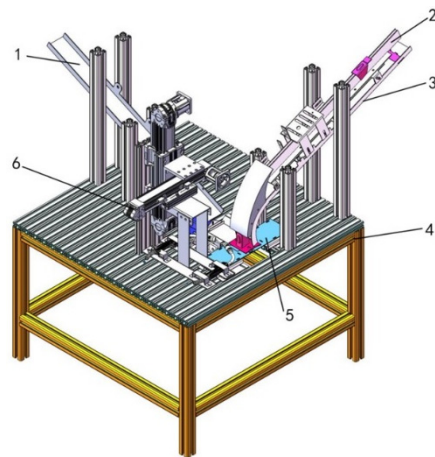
Structure diagram of duckbill welding robot for cotton seeder. 1. Girdle feeding mechanism; 2. static duckbill feeding mechanism; 3. hinge feeding mechanism; 4. support platform; 5. welding fixture; 6. welding actuator.
